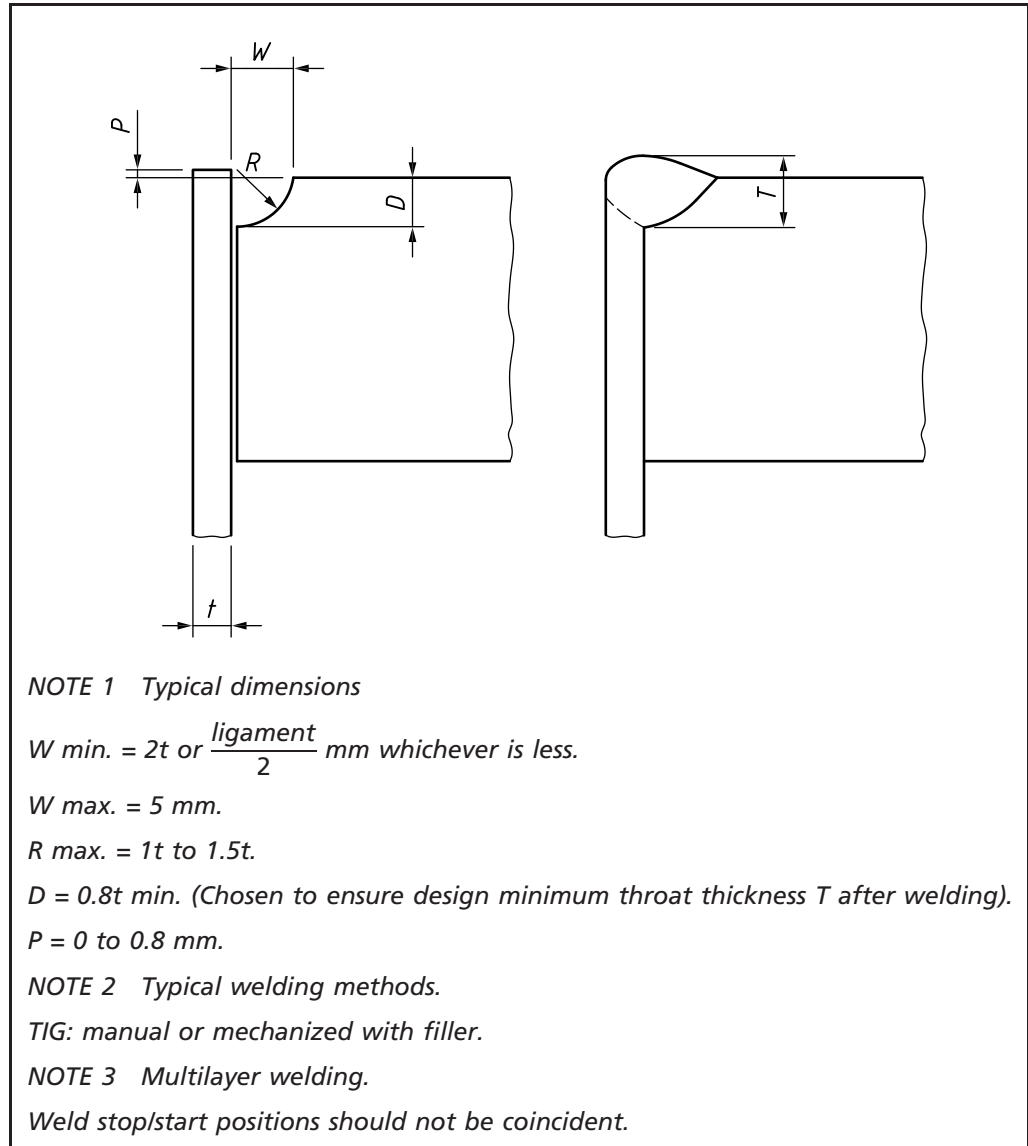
Tube to tubeplate connections, back face inset bore weld
